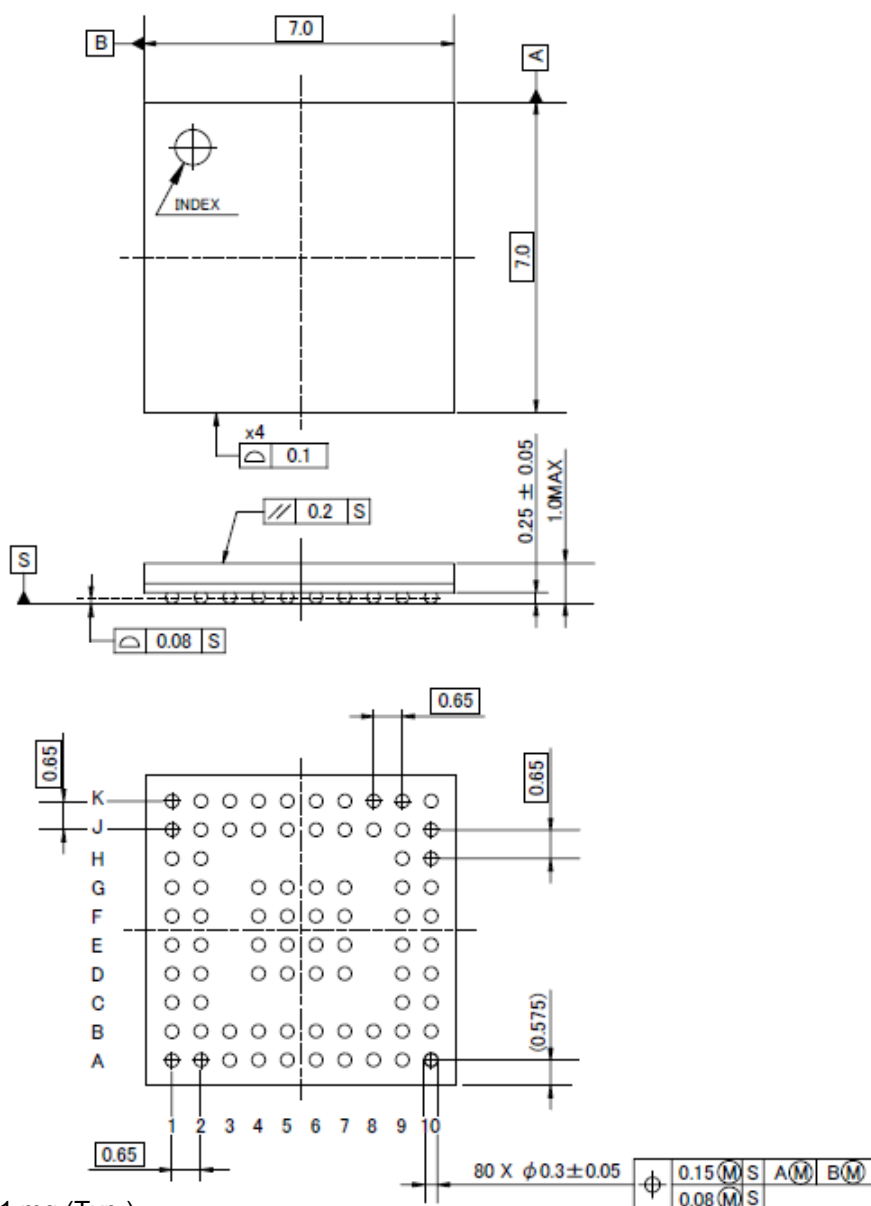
TC358778XB P-VFBGA80-0707-0.65-001 package
